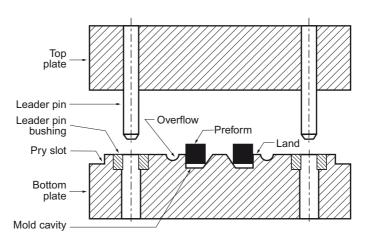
Open compression mold showing a rubber perform positioned in its mold cavity before closing the mold
